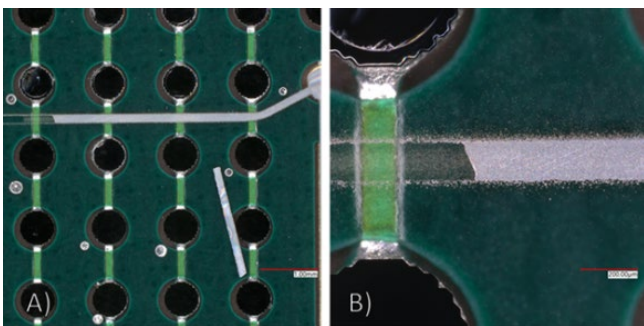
a) Fracture of printed SIR test structure and b) close-up of the fracture surface
